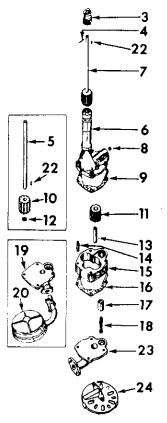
Exploded view of typical oil pump used on all series except 424, 444, 2424 and 2444 non-diesel engines. Items 5, 10, 12, 19, 20 and 22 are used on early type pump. NOTE: On early B-275 oil pump, a ball was used in place of plunger (17) to regulate oil pressure. Diesel and non-diesel pumps are basically similar.
